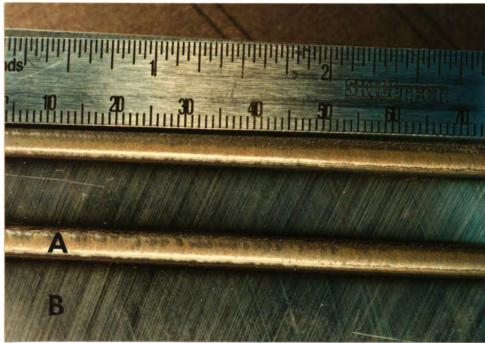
A view of a single cladding track with smooth surface on a steel plate.
